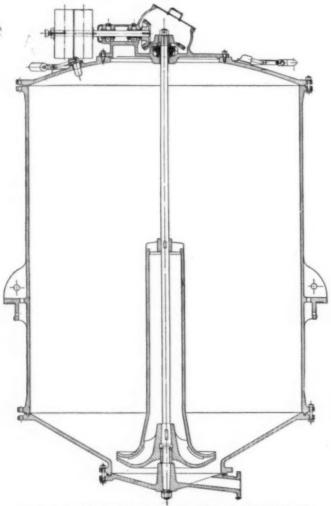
TURBINE IMPELLER AGITATOR AT BASE
